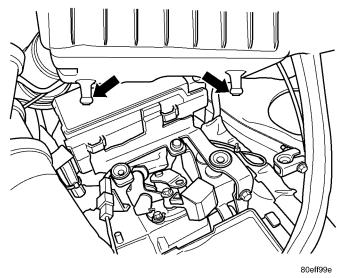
AIR CLEANER BOX LOCATOR PINS
